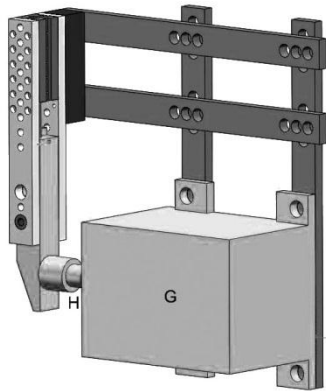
THE QSD ATTACHED TO THE AIR PISTON AND THE MOUNTING FIXTURE.
